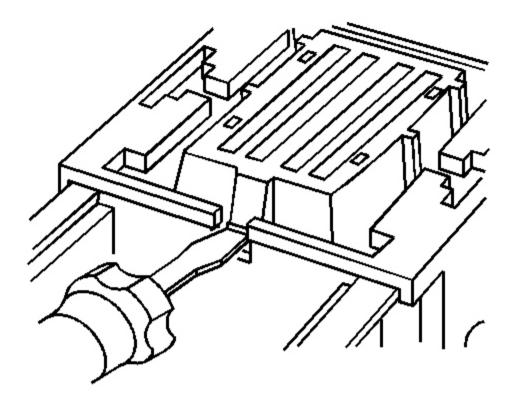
Removing Nose Piece Courtesy of GENERAL MOTORS CORP.
